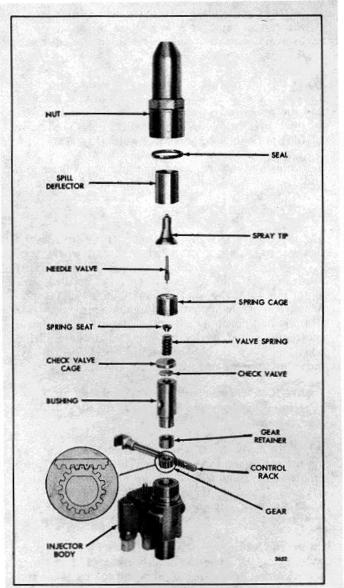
Injector Rack, Gear, Spray Tip and Valve Assembly Details and Relative Location of Parts
